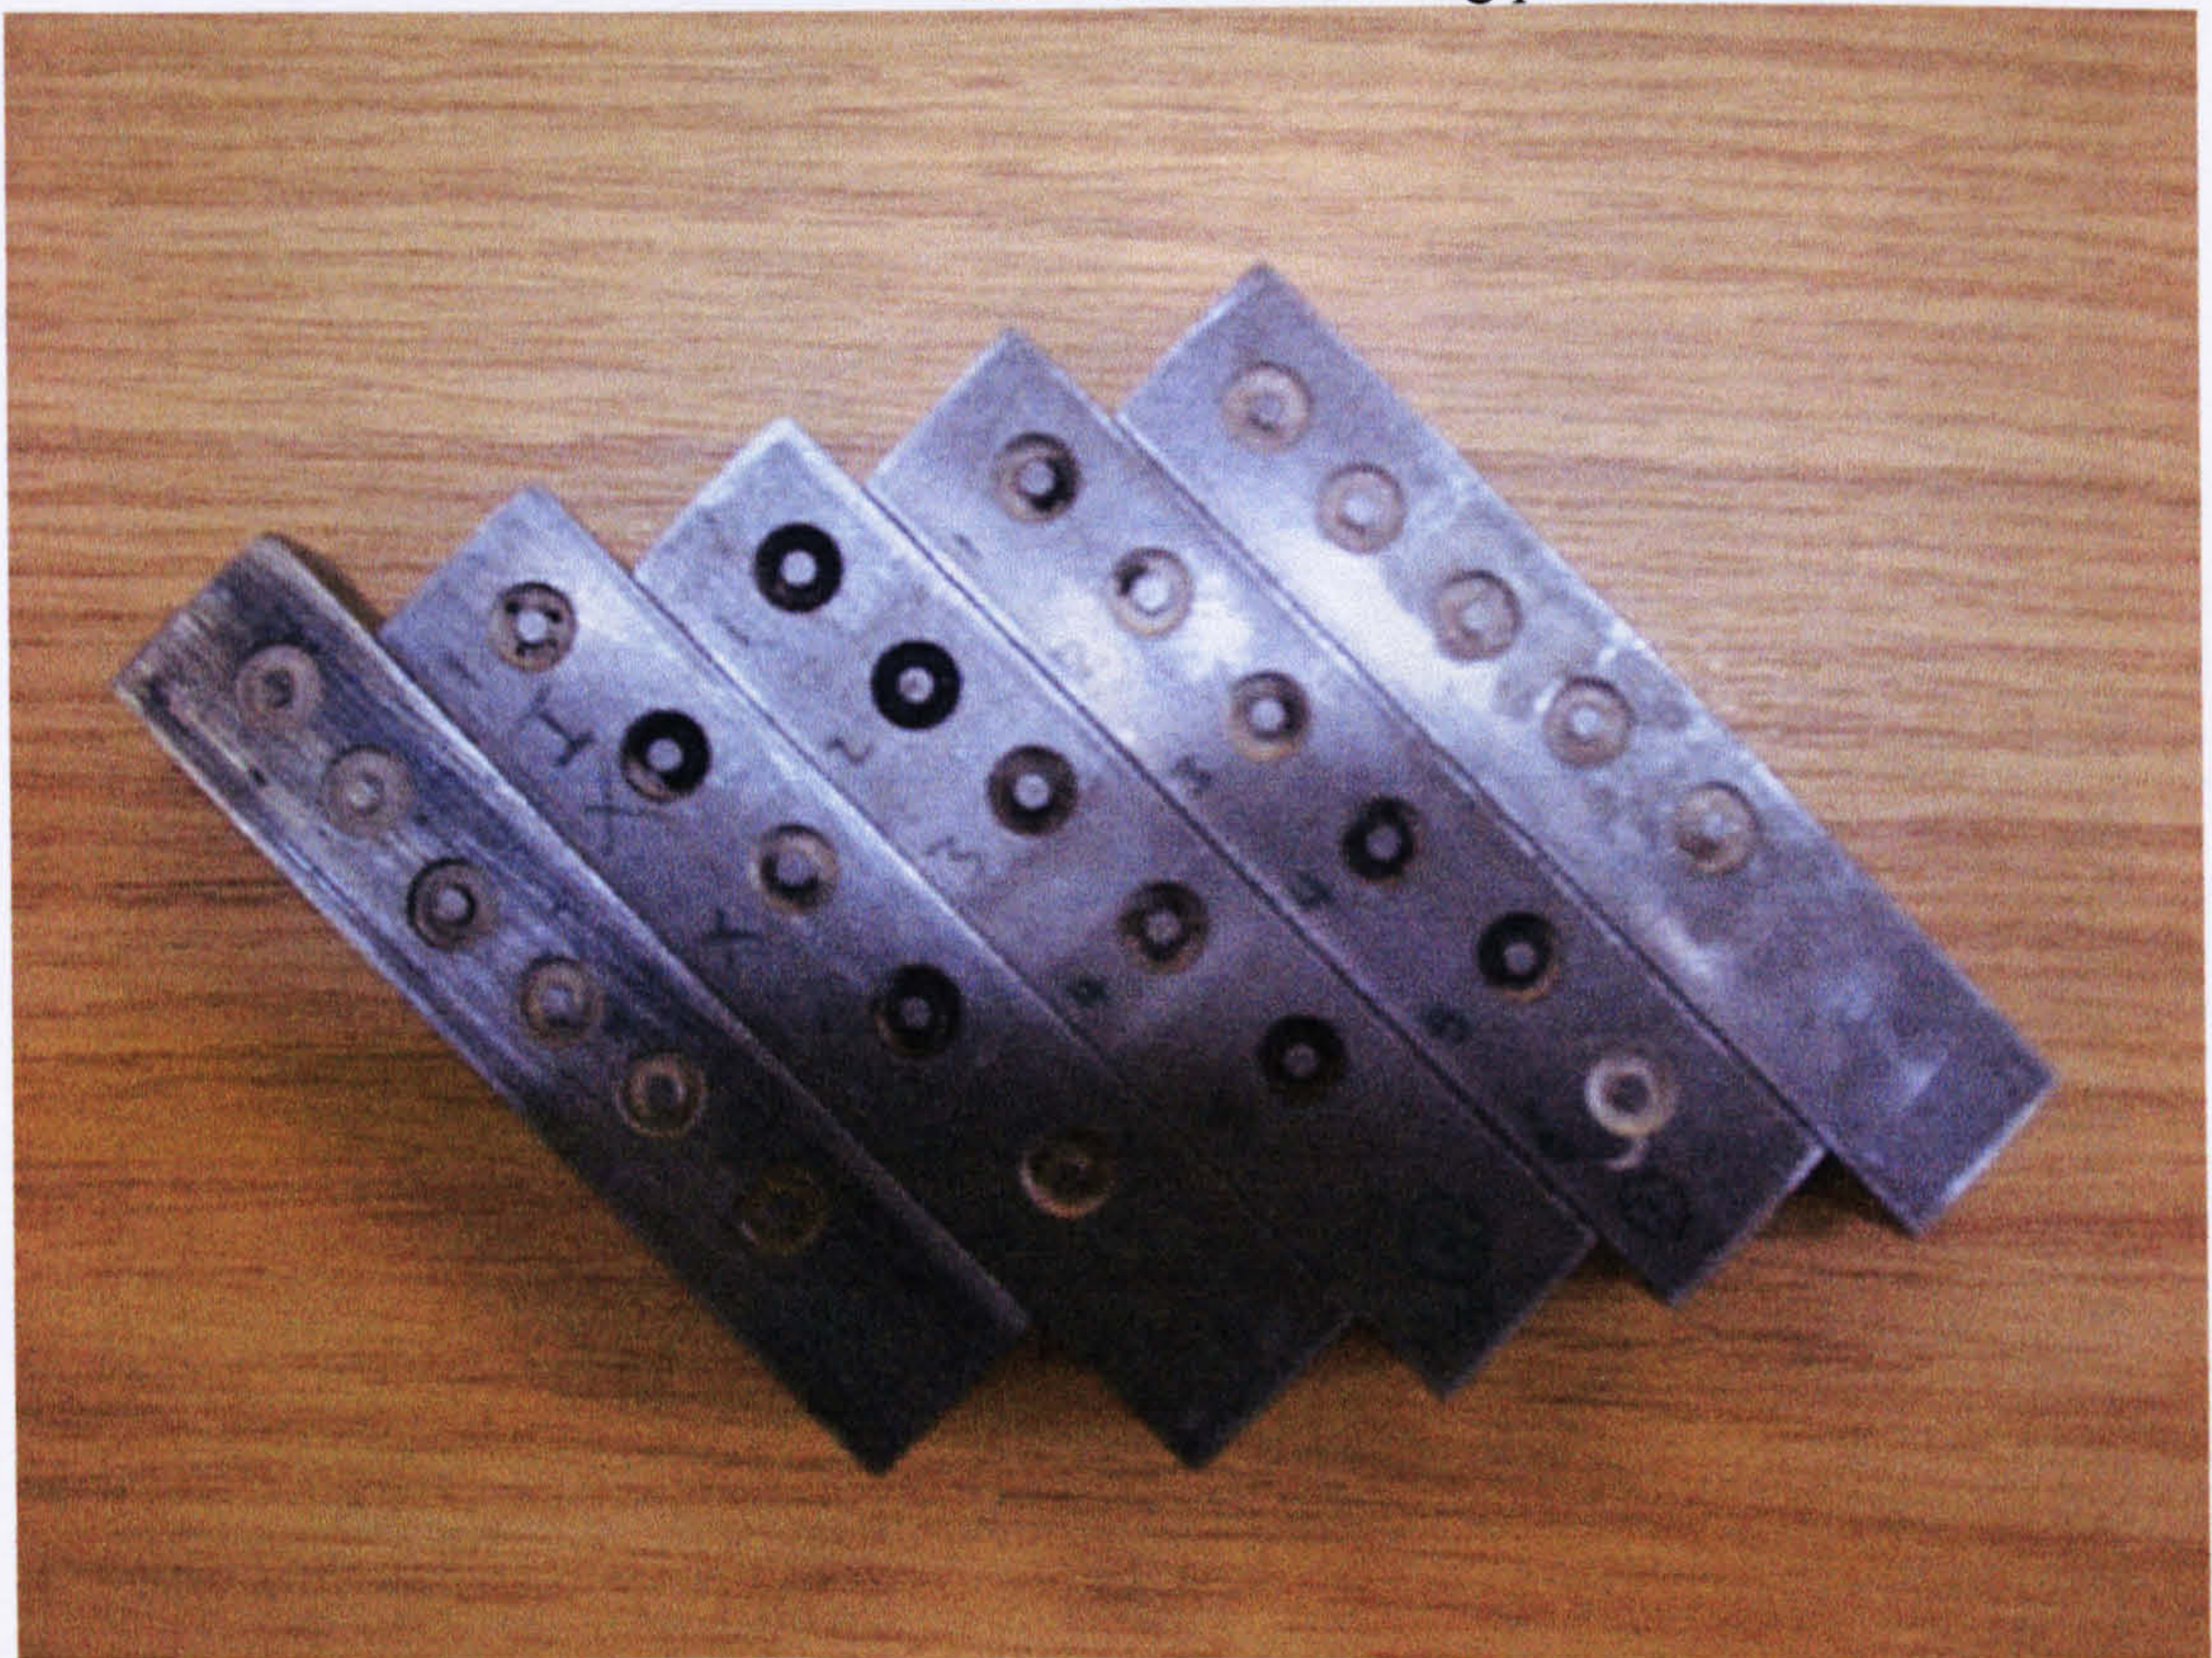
Different holes machined using developed system of control and existing system using various electrical machining parameters
